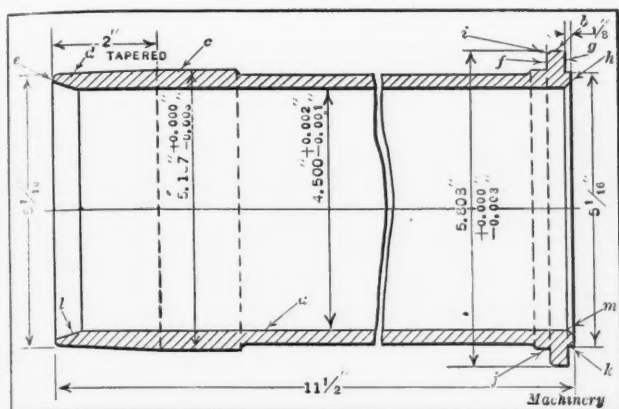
Design of the Cylinder Sleeve used in the Engines of International Harvester Co.'s Tractors
